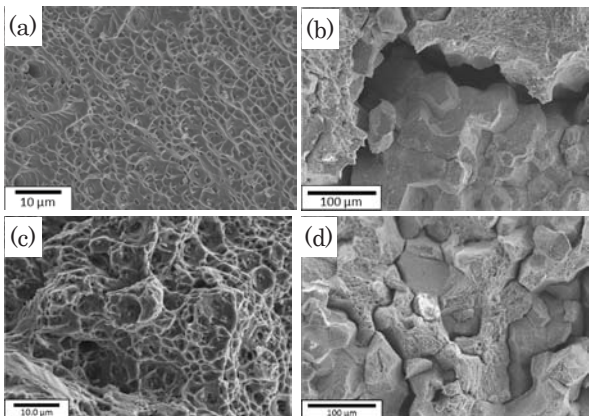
Fracture surfaces of EBM (a),(b) as-built and (c),(d) STA specimens.
